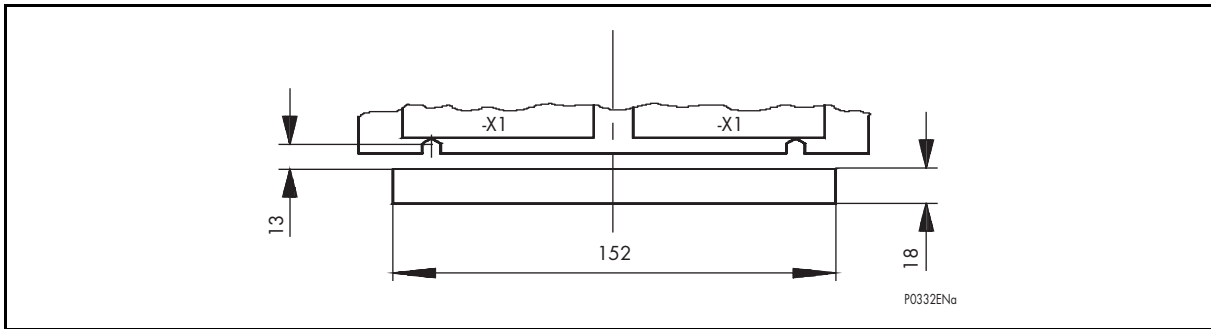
BOTTOM CUT-OUT TO FIT WIRING TO LOWER TERMINALS
